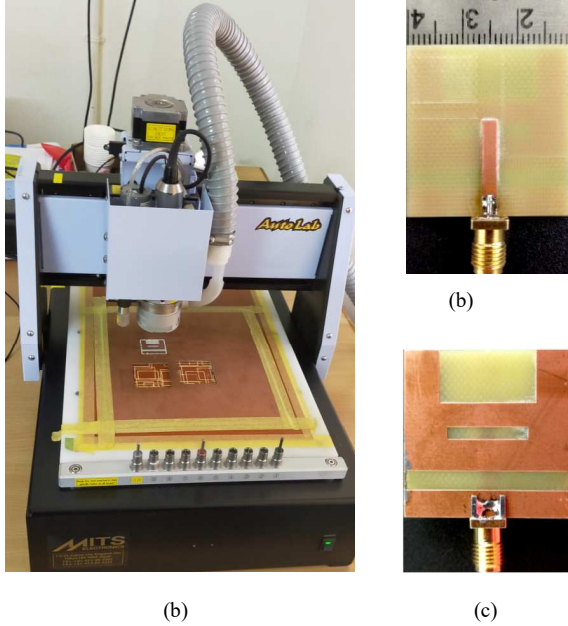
a) PCB prototyping machine. b) SGMA top view. c) SGMA bottom view.
